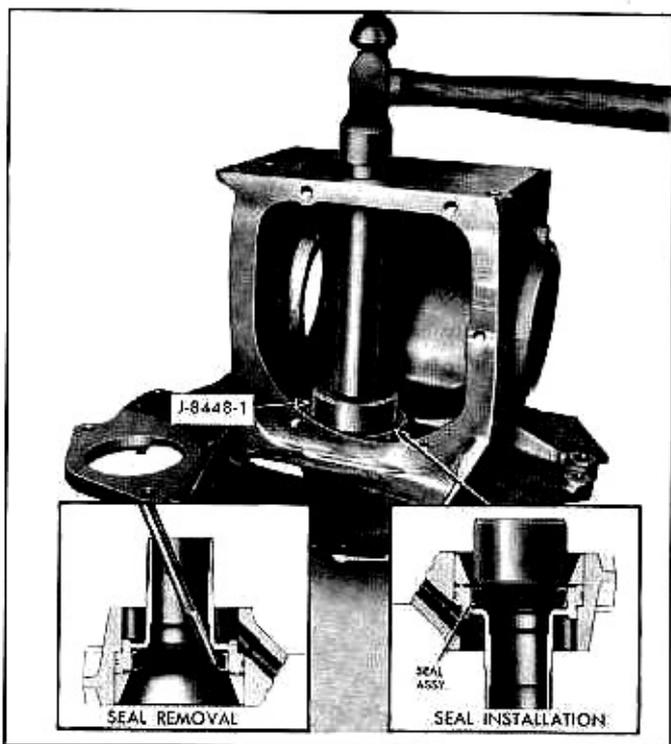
Installing Pinion Rear Oil Seal in Stator Shaft
